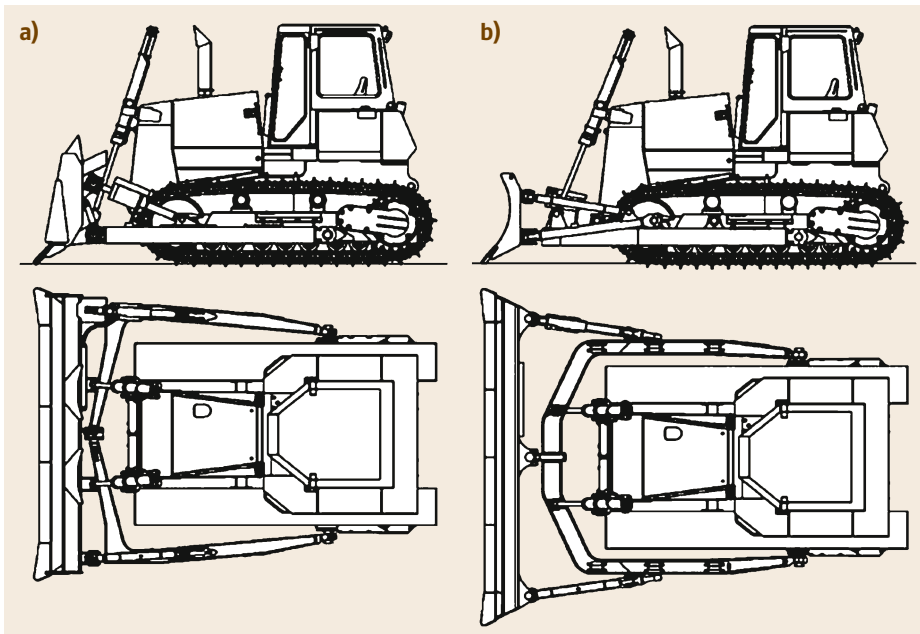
,b Dozer with standard blade and hollow geometry (a) and skewable U-carrier and flat geometry (b) (Liebherr, Telfs, Austria)
